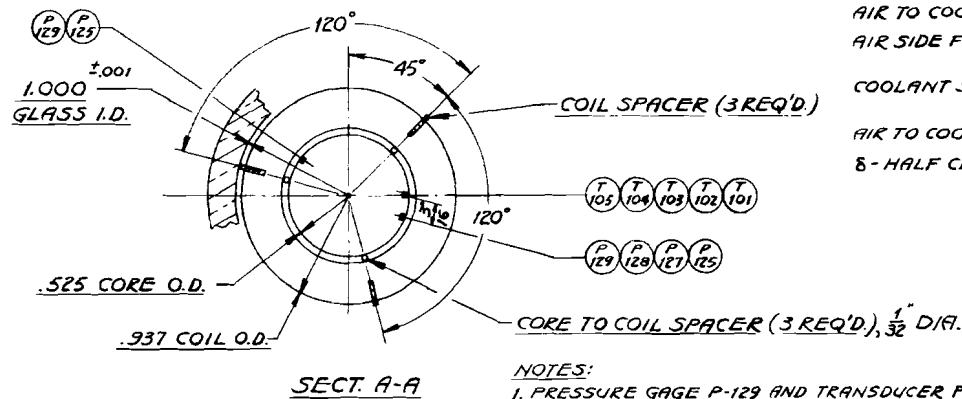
TEST HEAT EXCHANGER ASSEMBLY
